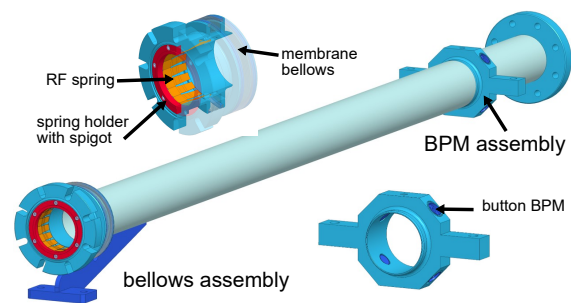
Before and after dipole chamber (BAD). The button-BPM is a stainless-steel (1.4429) body with welded BPM buttons, for more information [8]. The bellows assembly compensates for length changes during ring assembly to account for production tolerances and temperature fluctuations. Due to space constraints the BPM and bellows assembly are welded to the vacuum pipe on one side. The total length is approx. 1310 mm.
